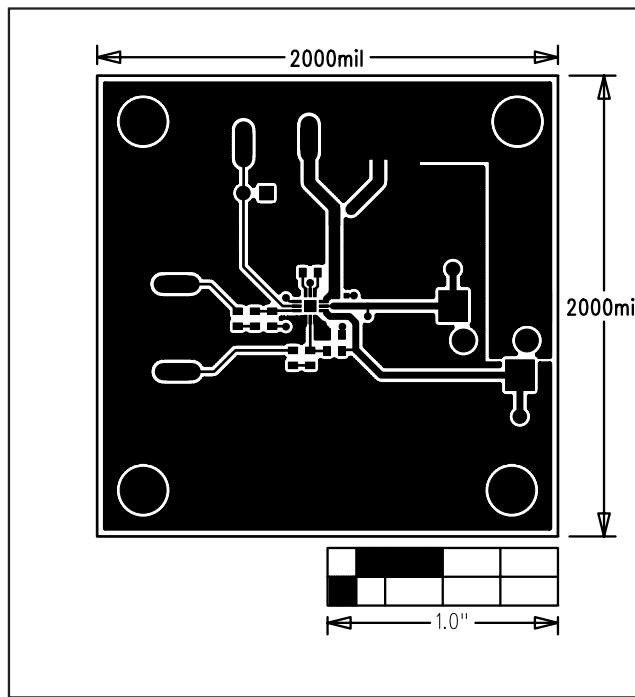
MAX9724A EV Kit PCB Layout—Component Side
